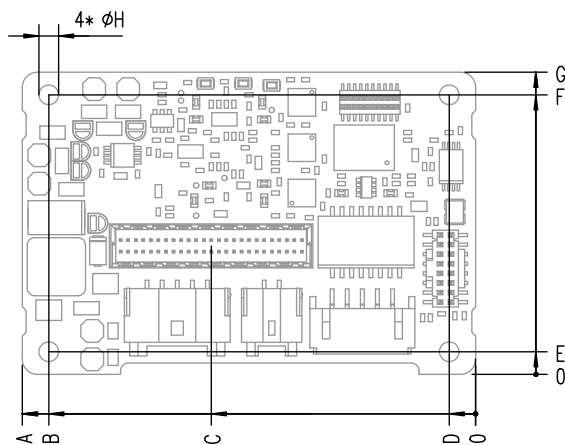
ETK-S20.0 Dimensions - Top View
